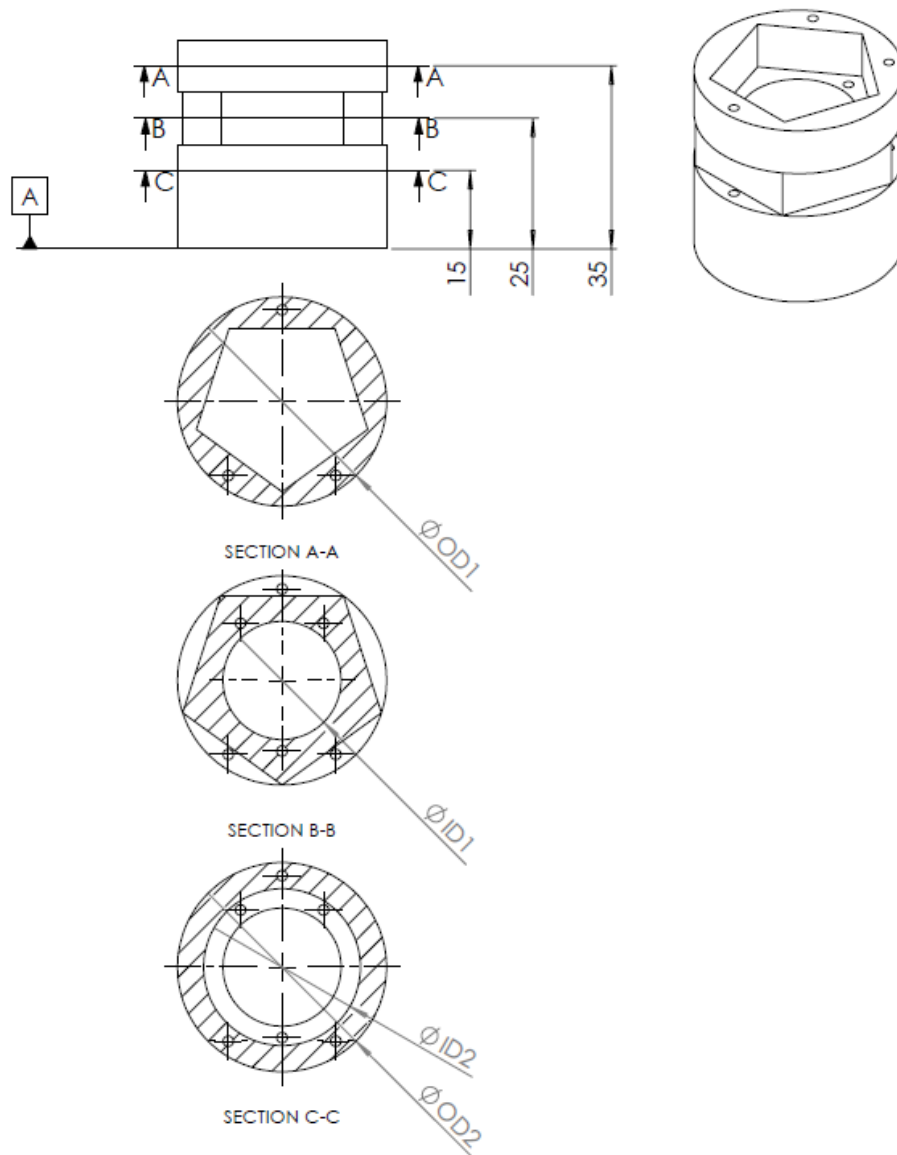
Measurement details for the multi cross-section workpiece. All dimensions in mm.
